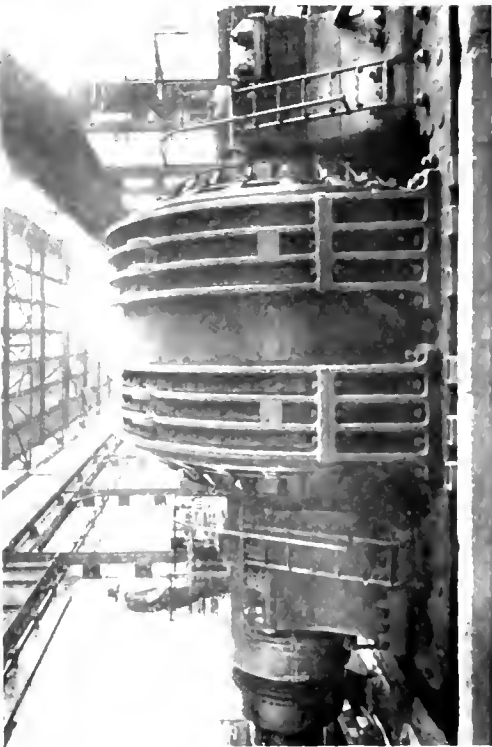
5000 h.p., 60 r.p.m., 1200 volt Motor Driving 40 in. Reversing Blooming Mill
